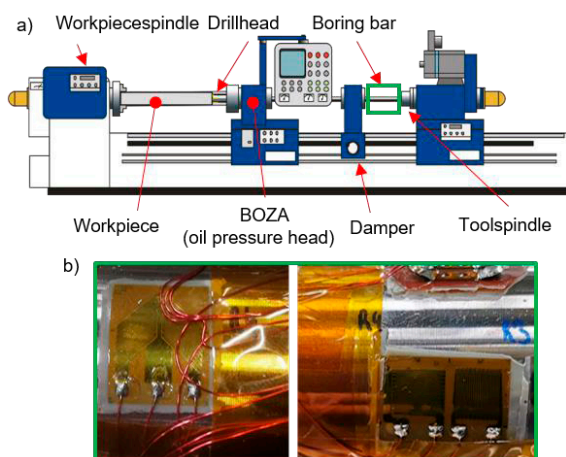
a) The BTA deep hole drilling machine Guiseppa Giana GBB 560. b) Strain gauges applied to the boring bar
